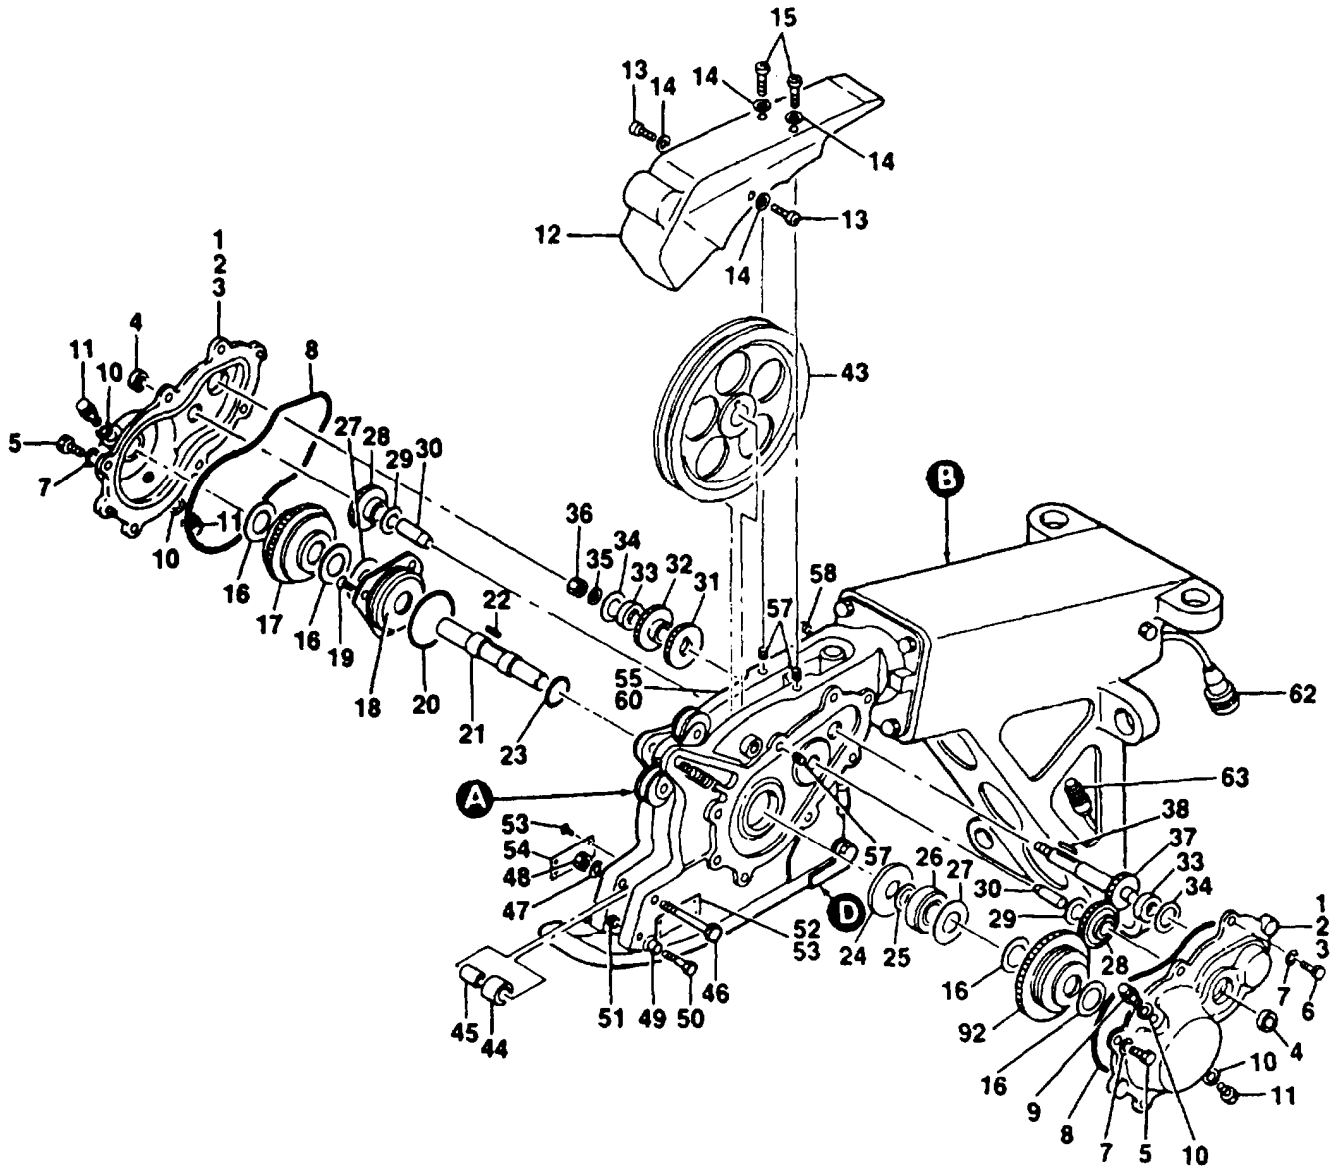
BOOM HEAD ASSY (SHEET 1 OF 4)
